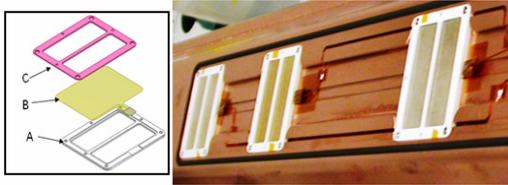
Three RFA grids installed on top of the RFA transmission holes. An exploded view of the grid shows ceramic base (A) and cap (C), and grid mesh (B).
